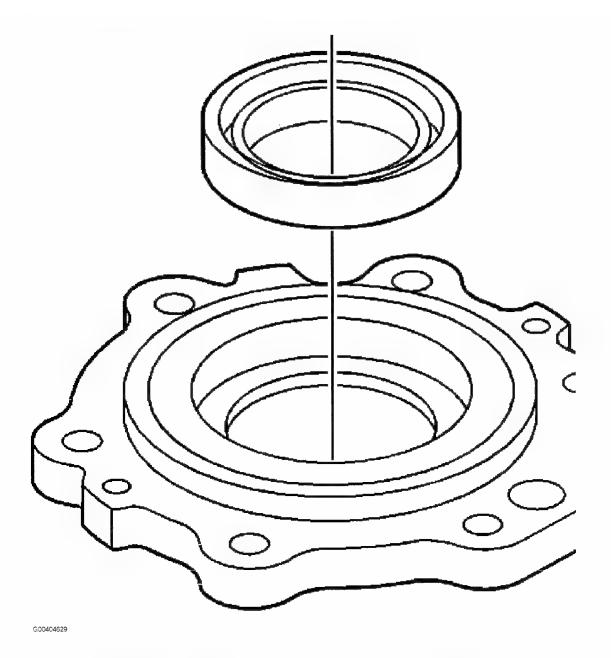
Installing Oil Seal In Input Shaft Bearing Retainer
